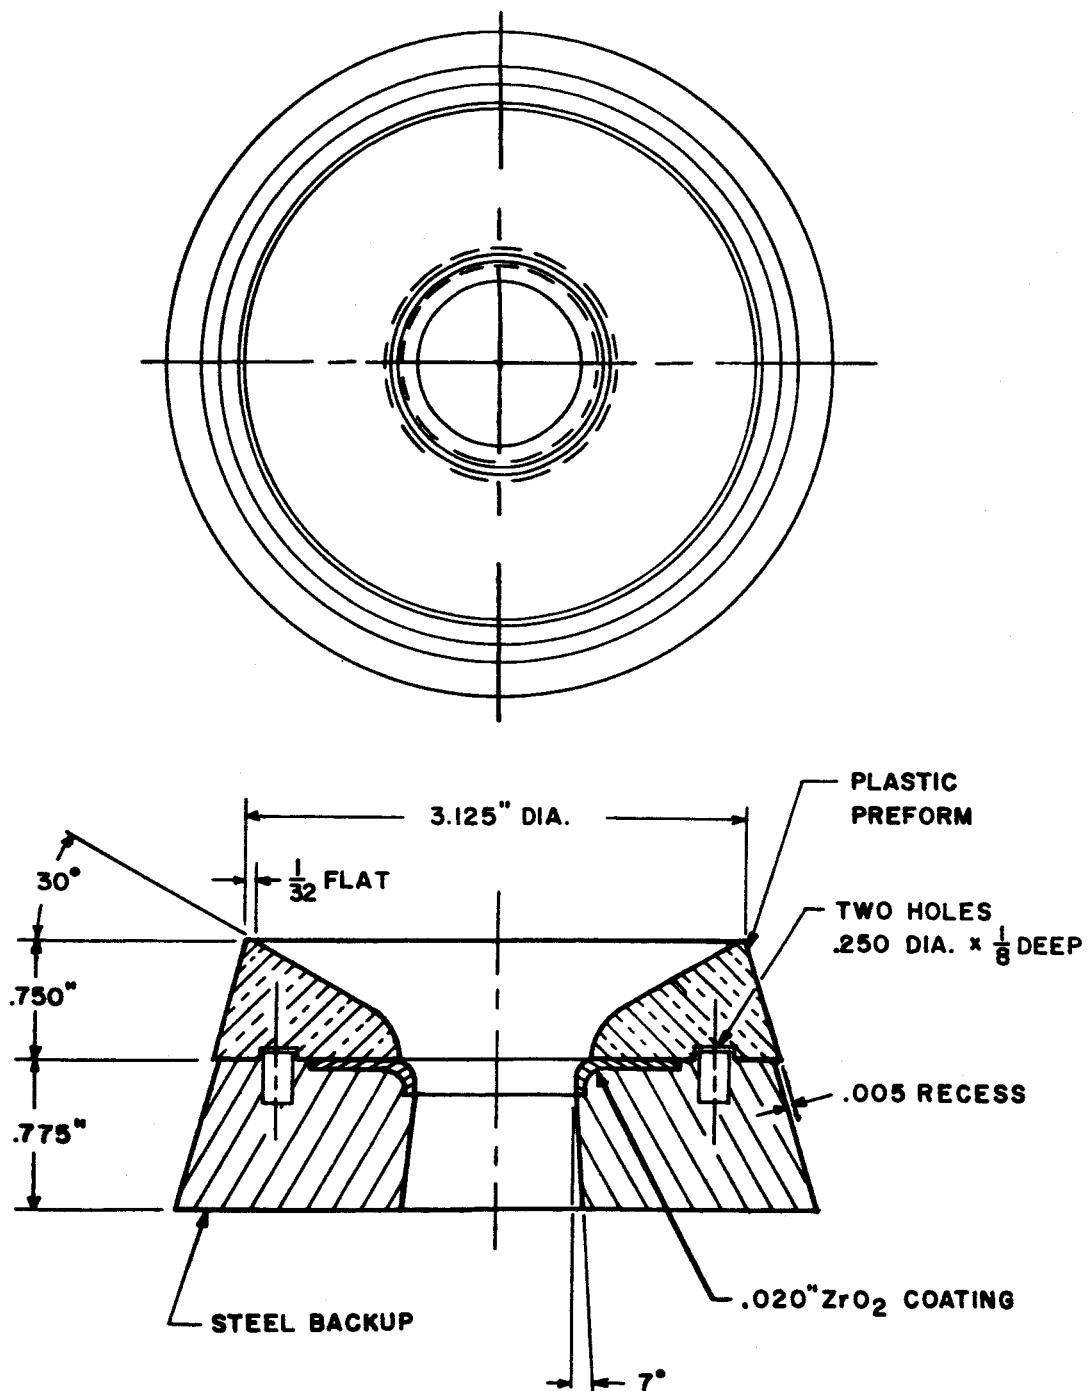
Assembly sketch of two piece plastic-tool steel extrusion die. (ref. 17).
